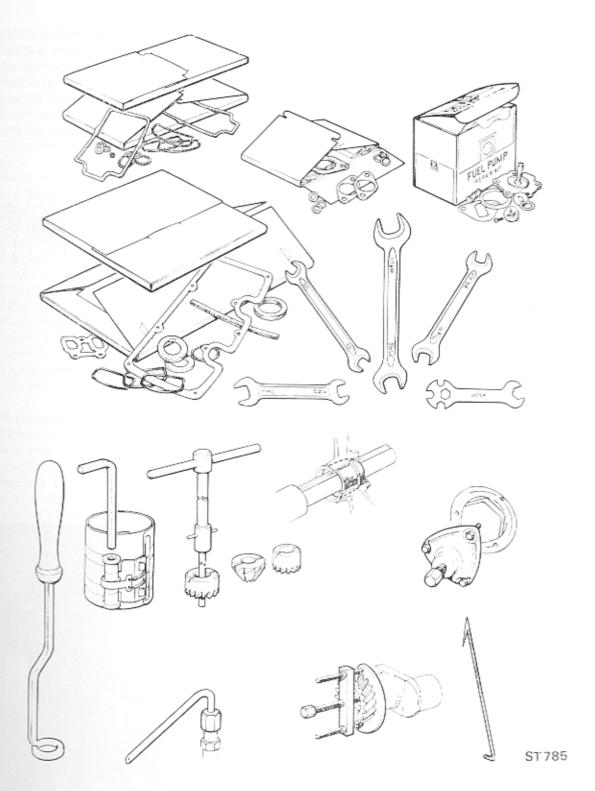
Tools and Joints Sets (See Engine Parts List for details)
